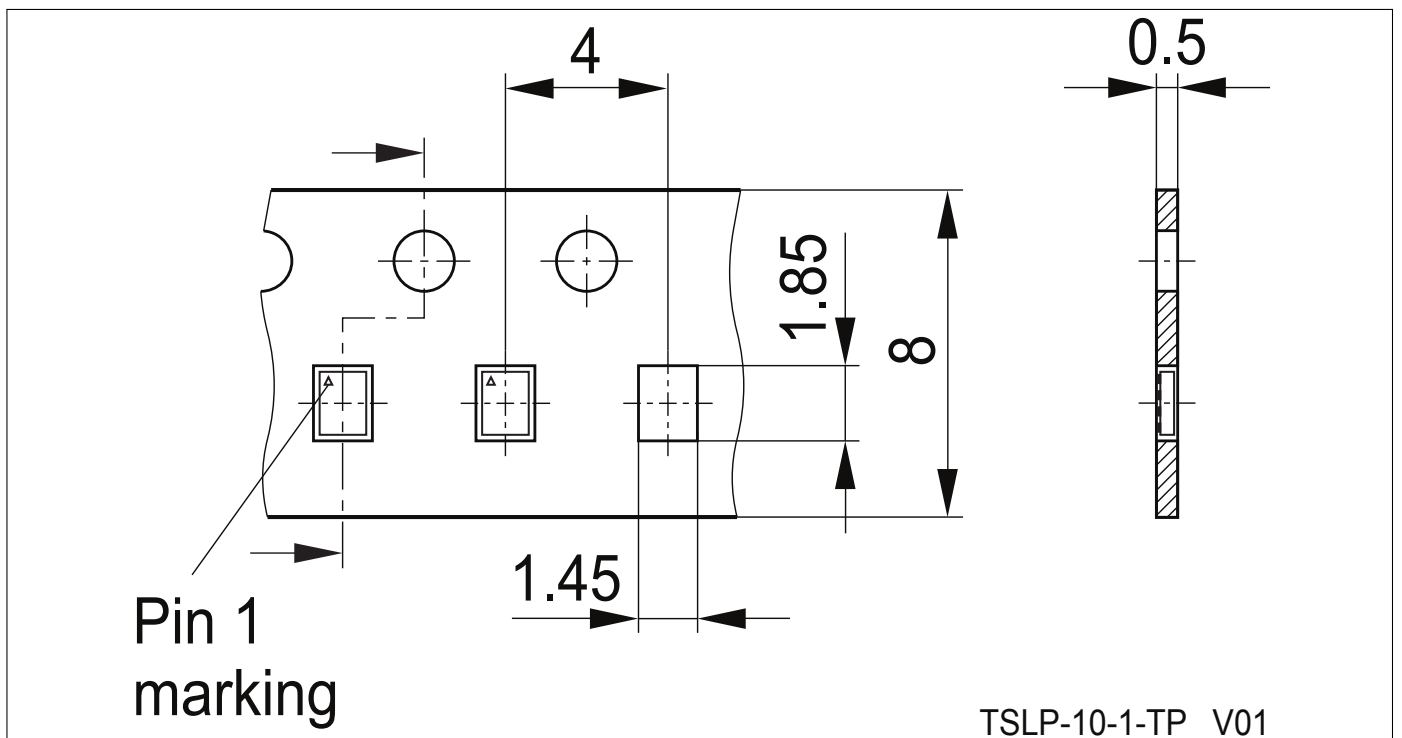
Tape and Reel Dimensions for TSLP-10-1
